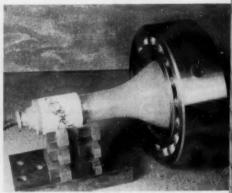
Setup for heating large bore ball bearing using an electric light bulb.
